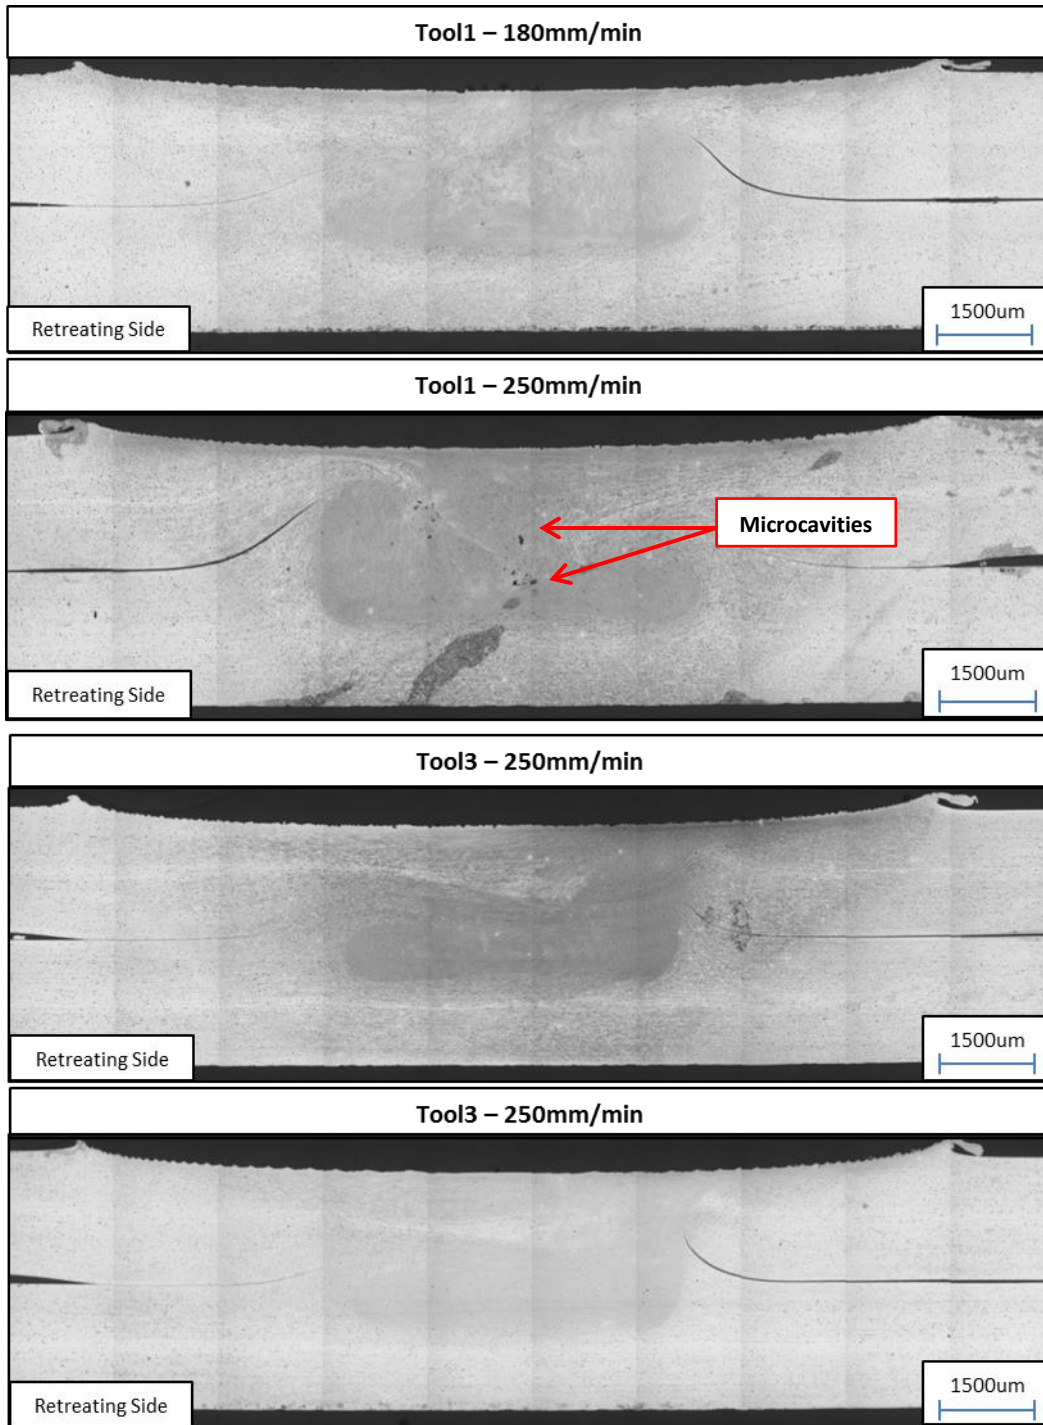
Optical micrograph images of a similar AA7075 FSW made at the following conditions: (a) Tool1-180mm/min (b) Tool1-250mm/min (c) Tool3-180mm/min (d) Tool3-250mm/min
